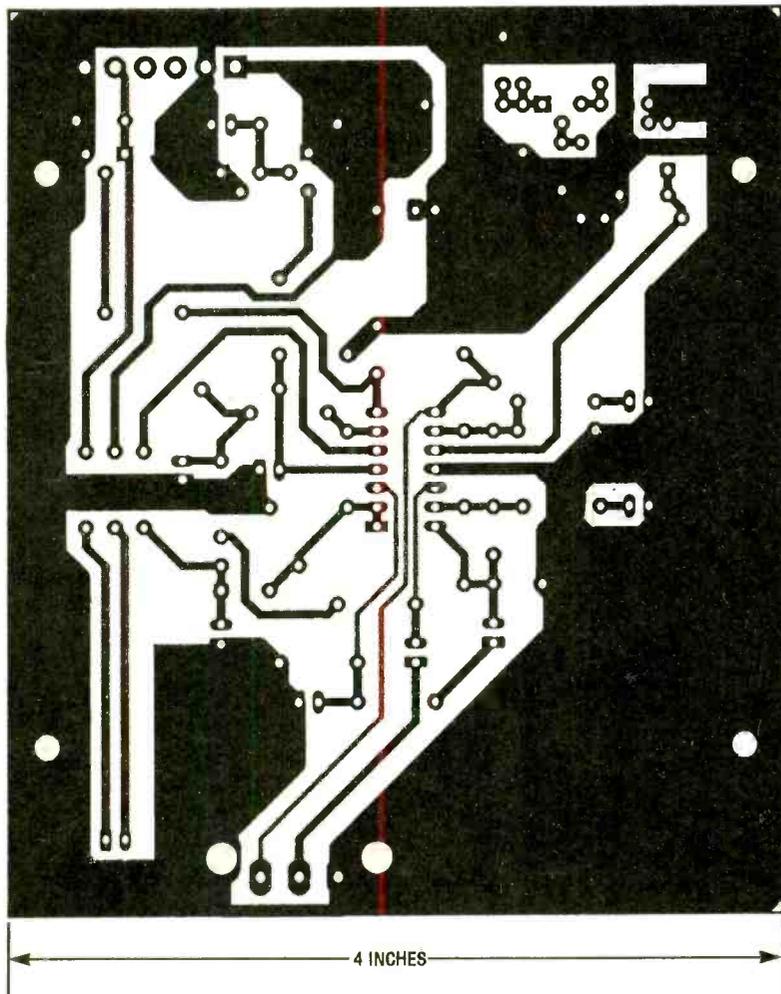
The project was assembled on a printed-circuit measuring about  $4 \times 4\frac{3}{4}$  inches. A template of that printed-circuit board layout is shown here full-size.
